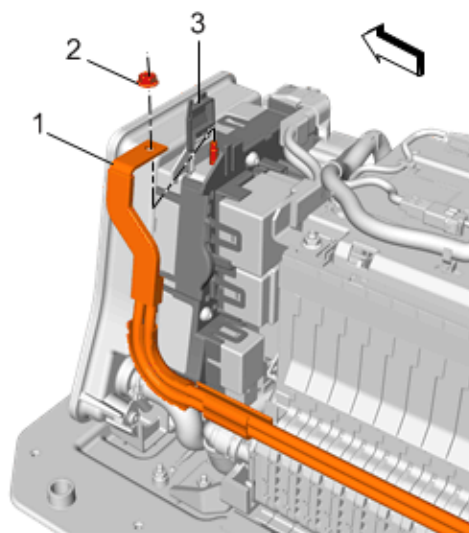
Terminal Cover, High Voltage Battery Positive Cable And Fastener
